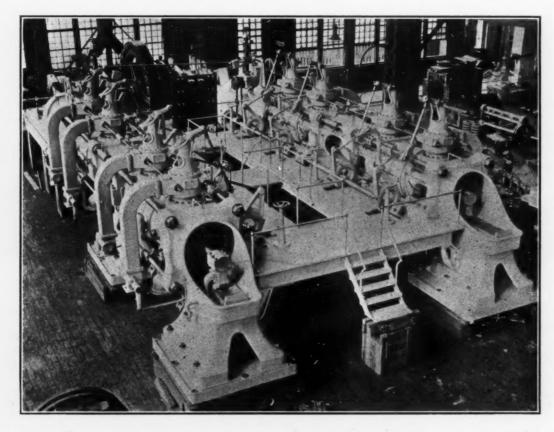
The Twin Tandem 1650-hp. Gas Engine to Be Installed for the Carnegie Steel Company by the William Tod Company.
